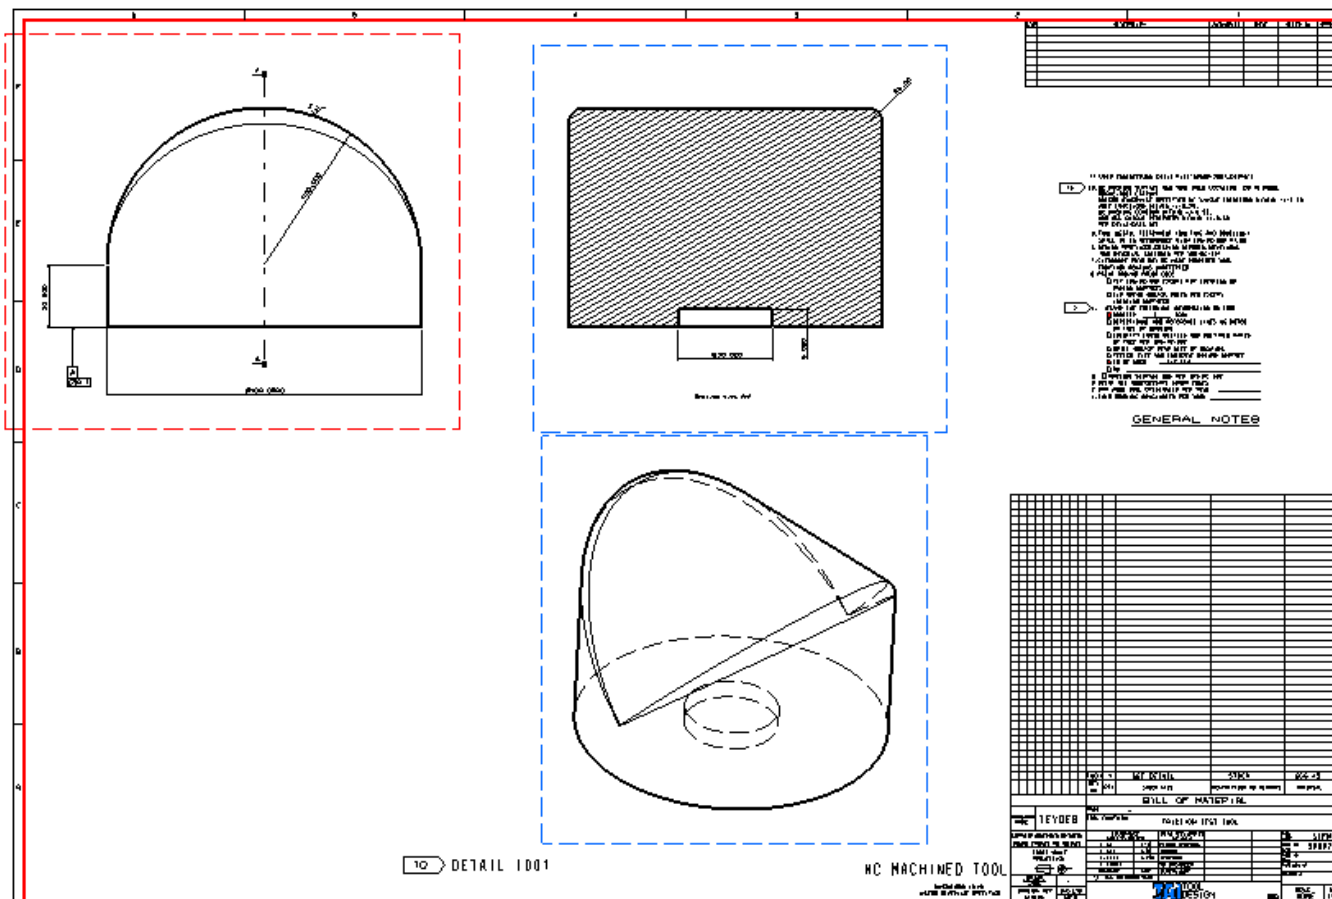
Technical drawing of a cylindrical punch which is used to form sheet specimen to identify friction coefficient under stretching
